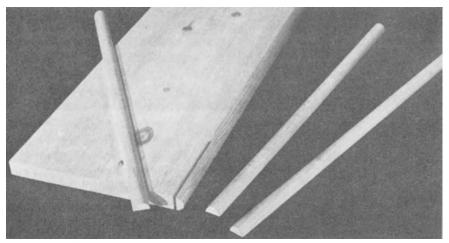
When the edge of the workpiece is sawed off, you have perfect half-round moldings.
